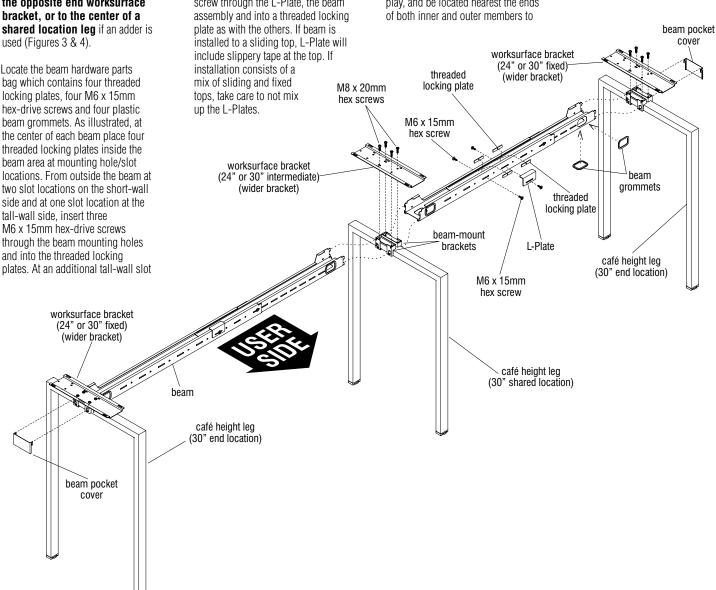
Single-Sided Fixed Café Height Benching, Multiple Worksurface (Adder) Legs & Beams
